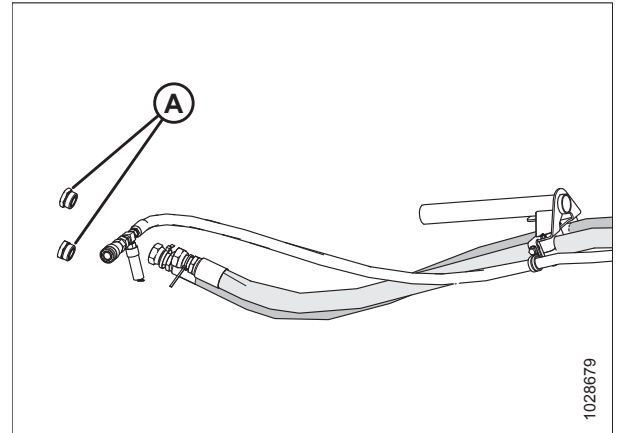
Protective Shipping Plugs on R216 Hydraulic Hoses
